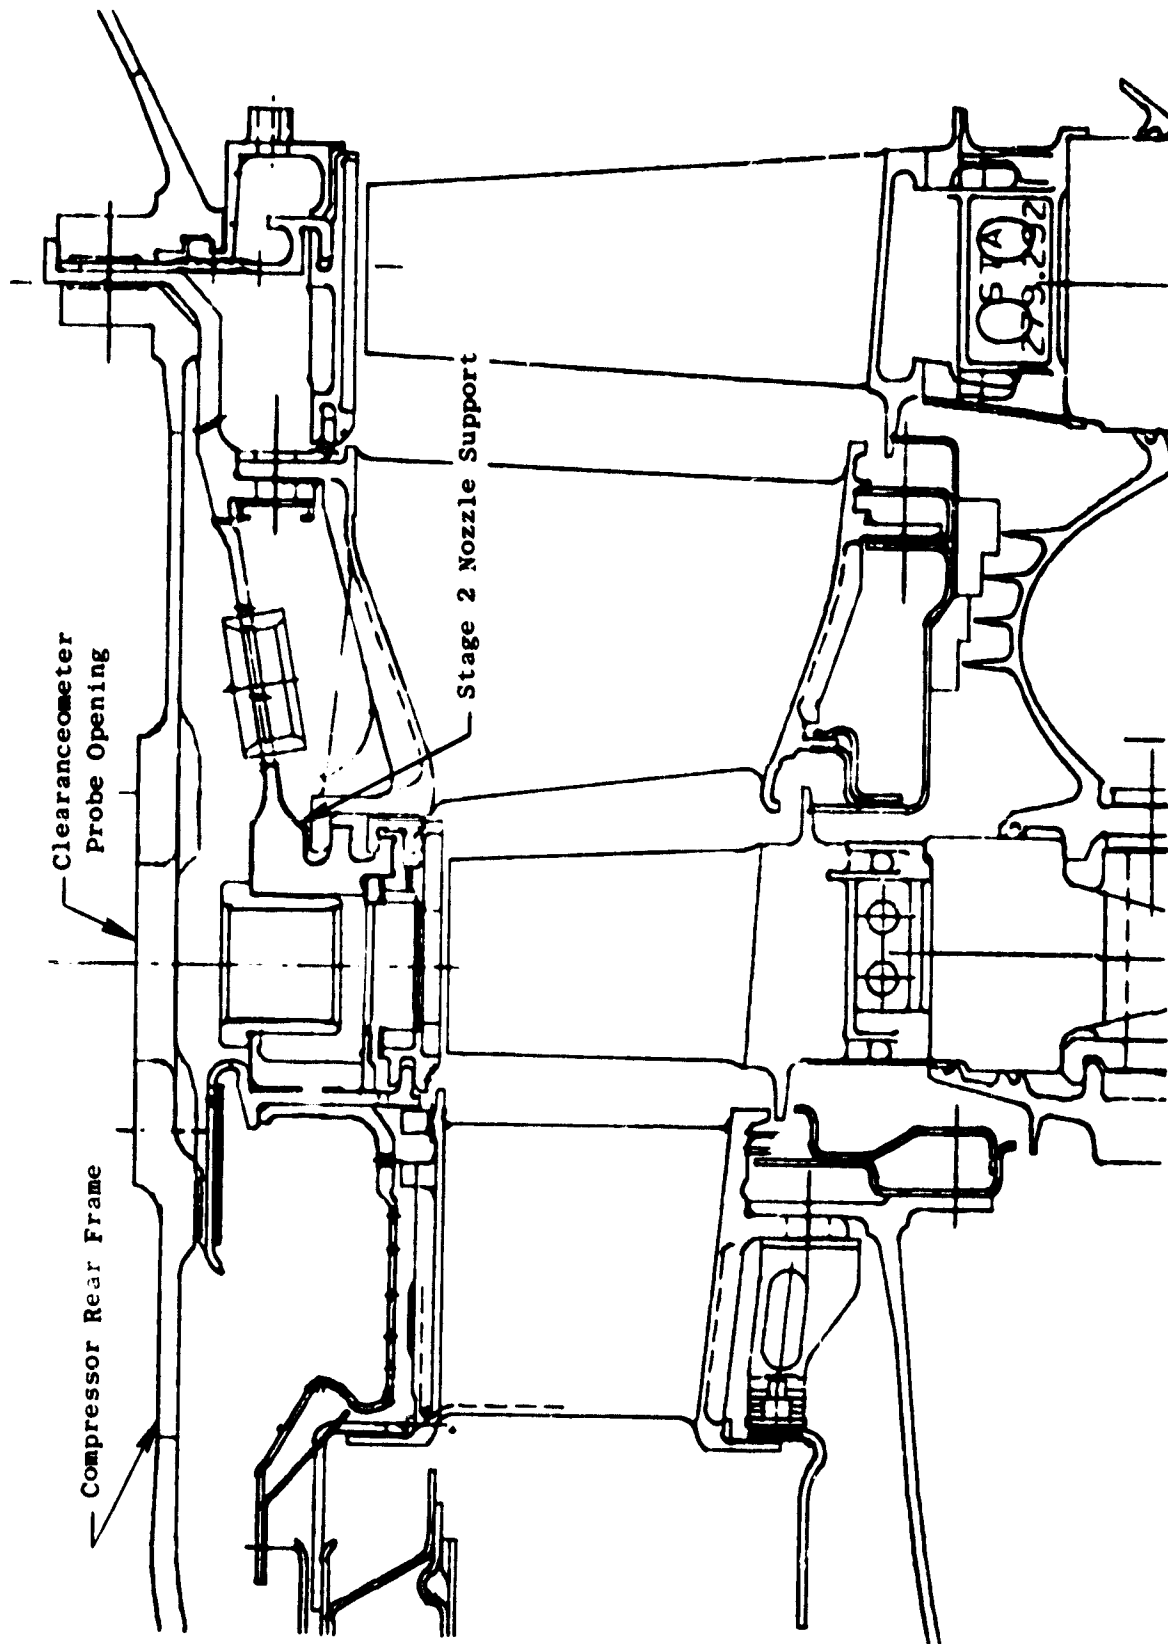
Improved Design Modified to Receive Clearanceometer Probes.
